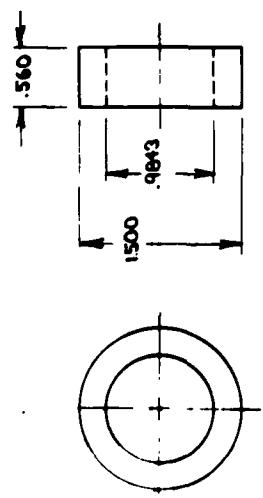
Bearing Block Mounting Bracket - El Axis.
